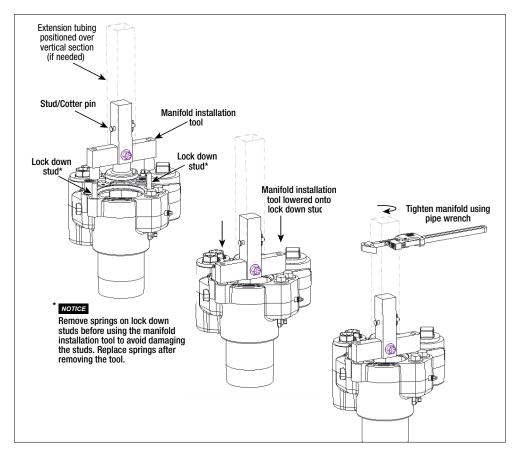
Utilizing the Manifold Installation Tool with RA Model STPs
